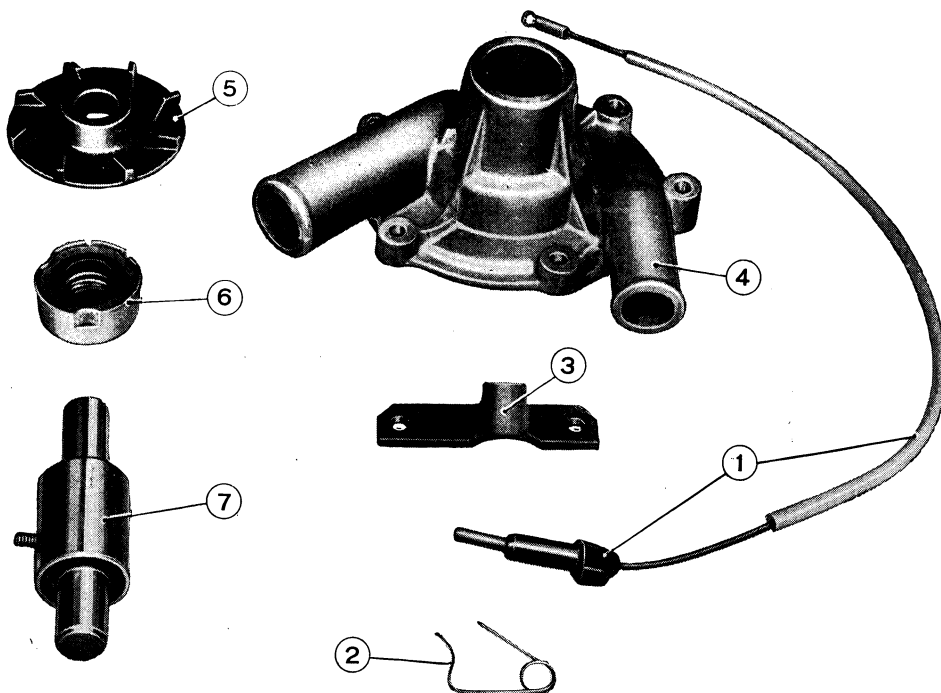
Components of water pump and fan wiring - engine 118 B.000.
